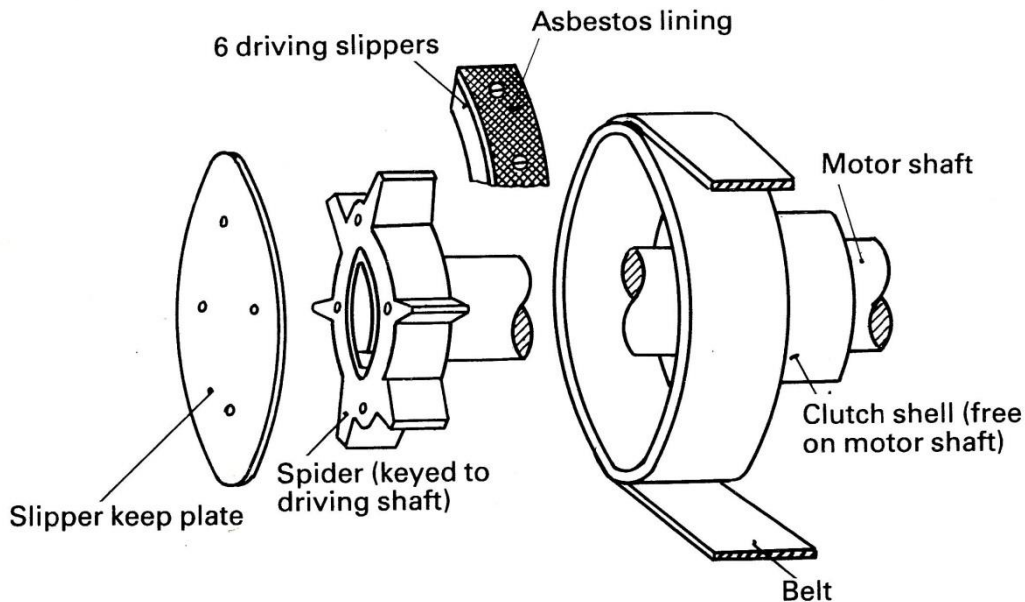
Loose-weight type of centrifugal clutch (exploded view)
